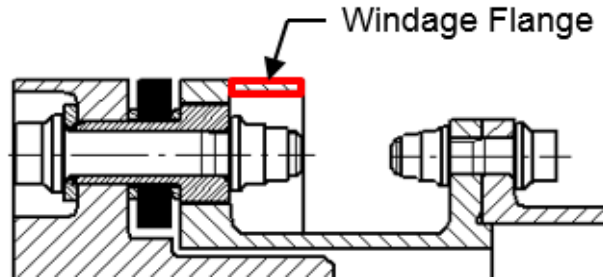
Section View of Coupling with Windage Flange (Reprinted from [11])
